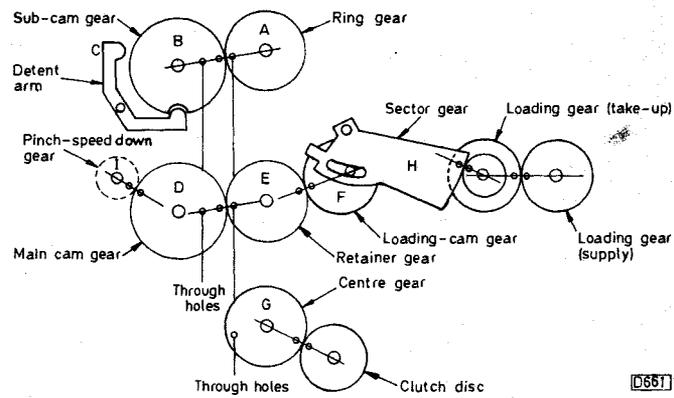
Assembly/alignment order for the gears on the underside of the mechanism.
